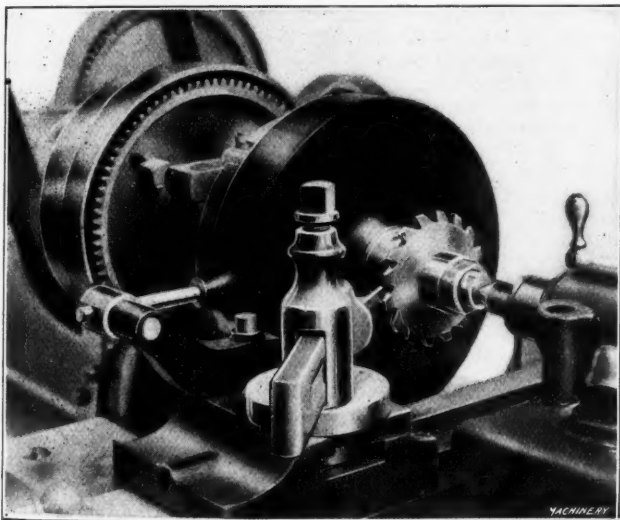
Tapping and Reaming Fixture used in connection with Turret Toolpost
